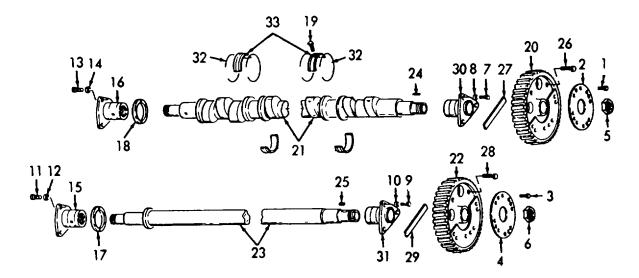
Camshaft and Balance Shaft, Removal/Installation.
